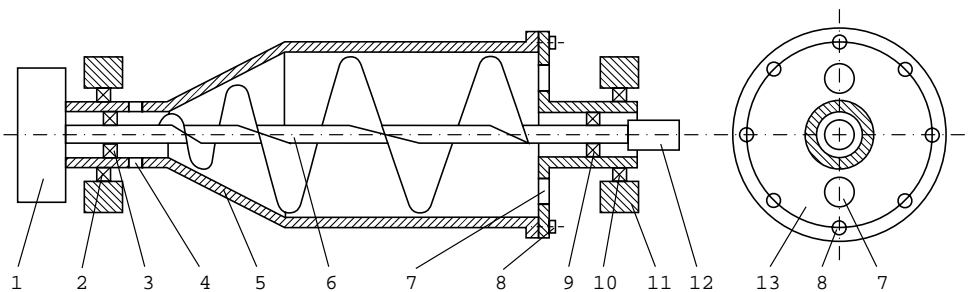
Sketch showing the structure of the horizontal spiral centrifuge. 1. Gear reducer, 2. Ball bearing, 3. Ball bearing, 4. Solid outlet, 5. Outer drum rotor, 6. Inner spiral rotor, 7. Liquid outlet, 8. Fixed bolt, 9. Ball bearing, 10. Ball bearing, 11. Machine basis (bearing seat), 12. Extension part of inner rotor, 13. Right end of drum.
